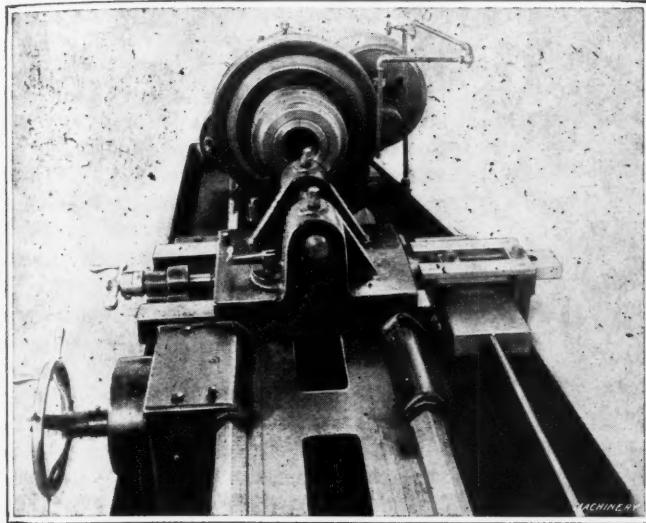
Partial View of Lathe showing Arrangement of Taper Turning Attachment
